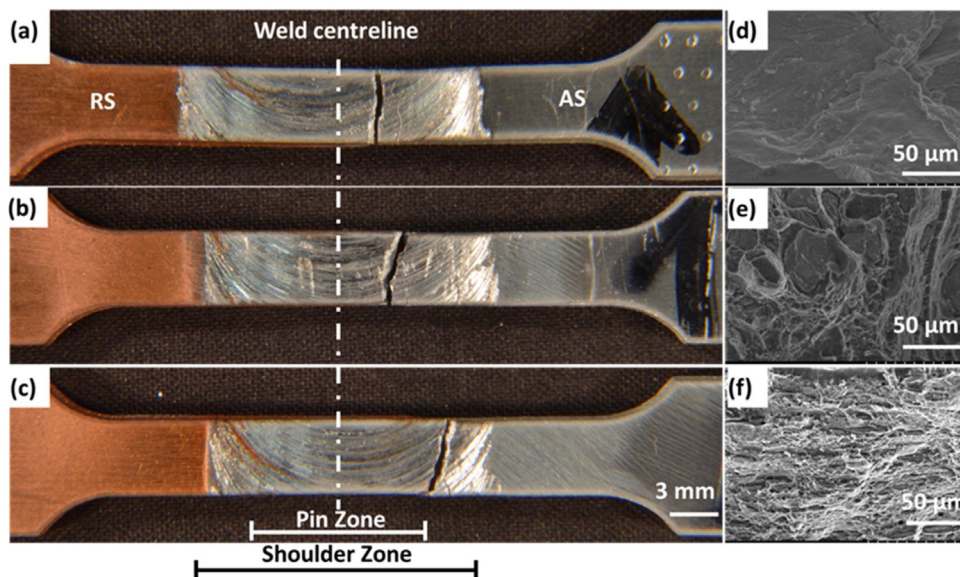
Fractography of the welds at tests no. 2 (a&d), 4 (b&e) and 7 (c&f).
